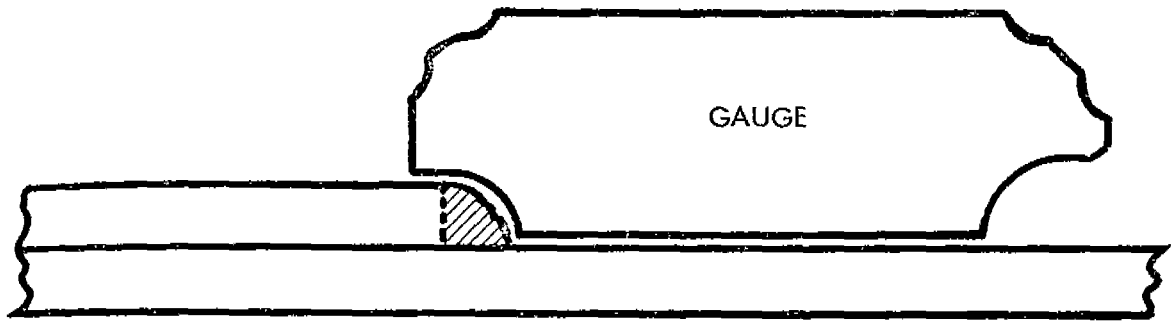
A CONVEXITY MEASUREMENT OF A LAP JOINT WELD
